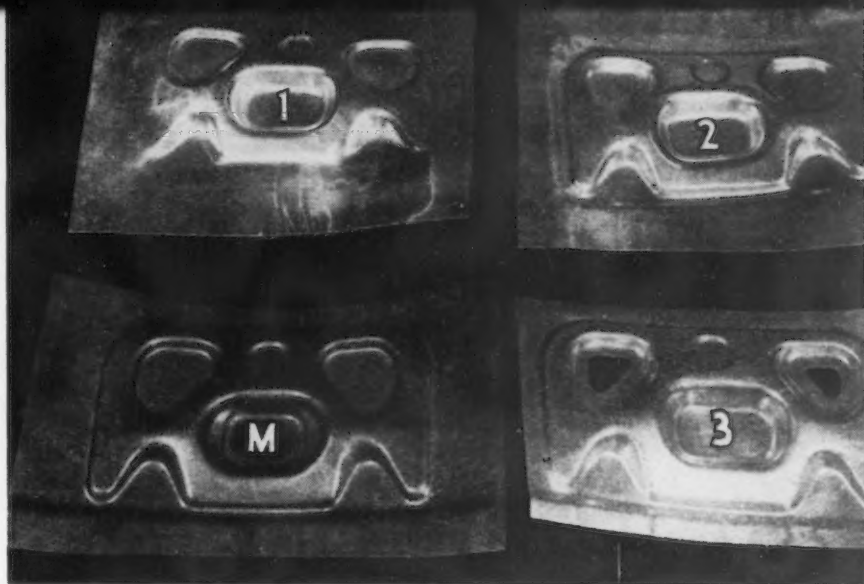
Aluminum parts are stage-formed on two starter dies, 1 and 2, and completed in finish die, 3. The hot formed magnesium alloy part, M, required finish die only.
